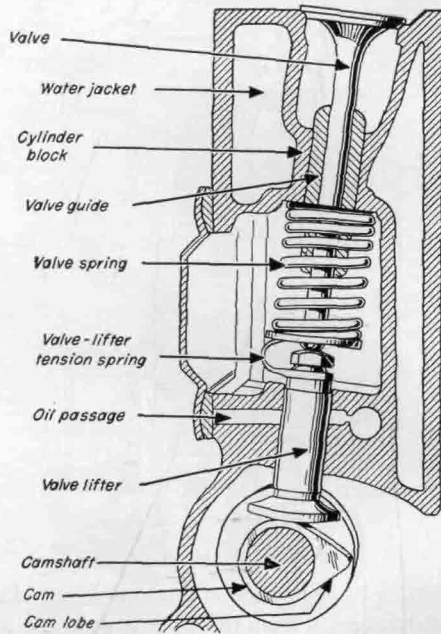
Valve mechanism. Valve is raised off seat with every camshaft rotation. (Studebaker-Packard Corporation)
